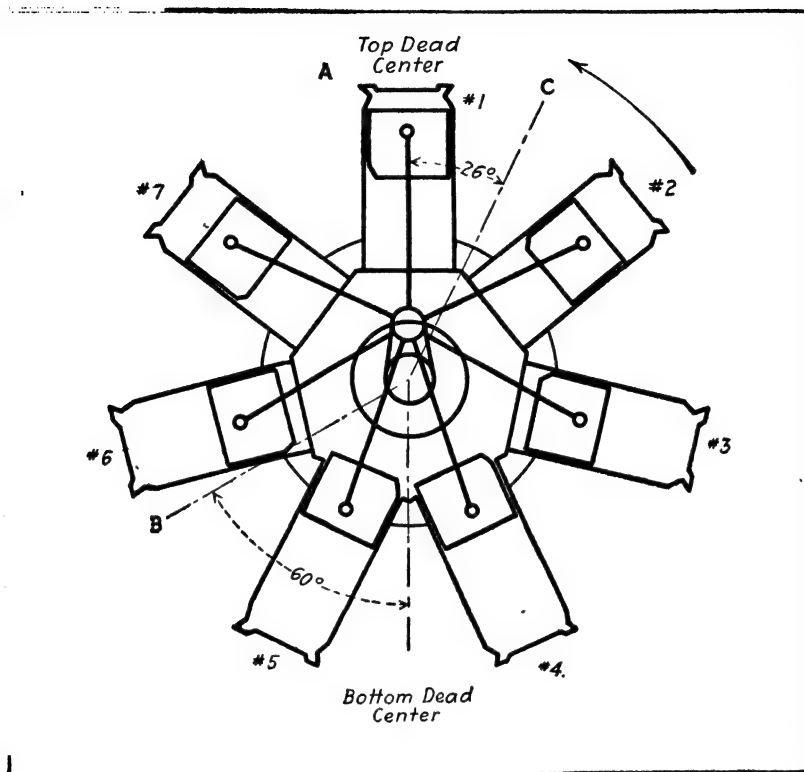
Diagram Showing Positions of Pistons in LeRhône Rotary Cylinder Motor when Piston in Cylinder No. 1 is at Top Dead Center.
